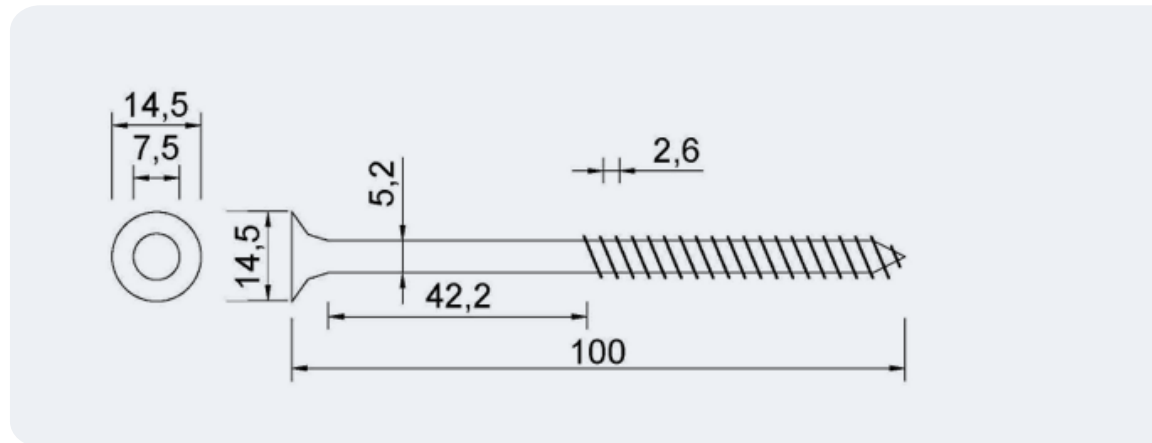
Dimensions of the Type 17 screws used for manufacture.
